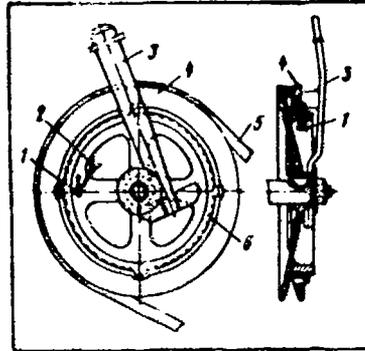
Adjustment of Compressor Drive Belt Tension: 1, stop bolt; 2, key; 3, wrench; 4, adjusting coupling; 5, drive belt; 6, compressor pulley
